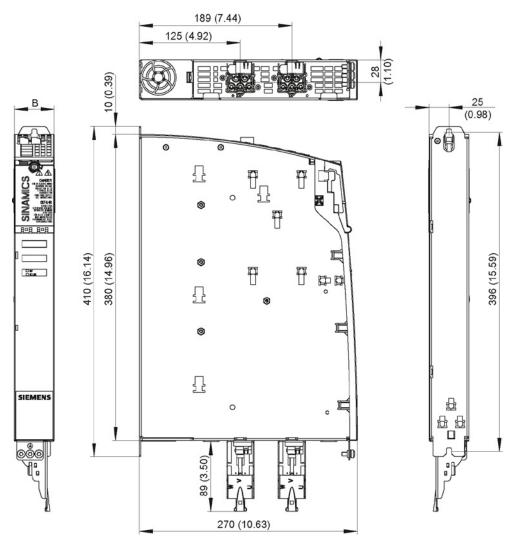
Dimension drawing of Motor Modules Booksize with internal air cooling 3 A to 18 A and 2 x 3 A to 2 x 9 A, all dimensions in mm and (inches); example: Double Motor Module 2 x 5 A
